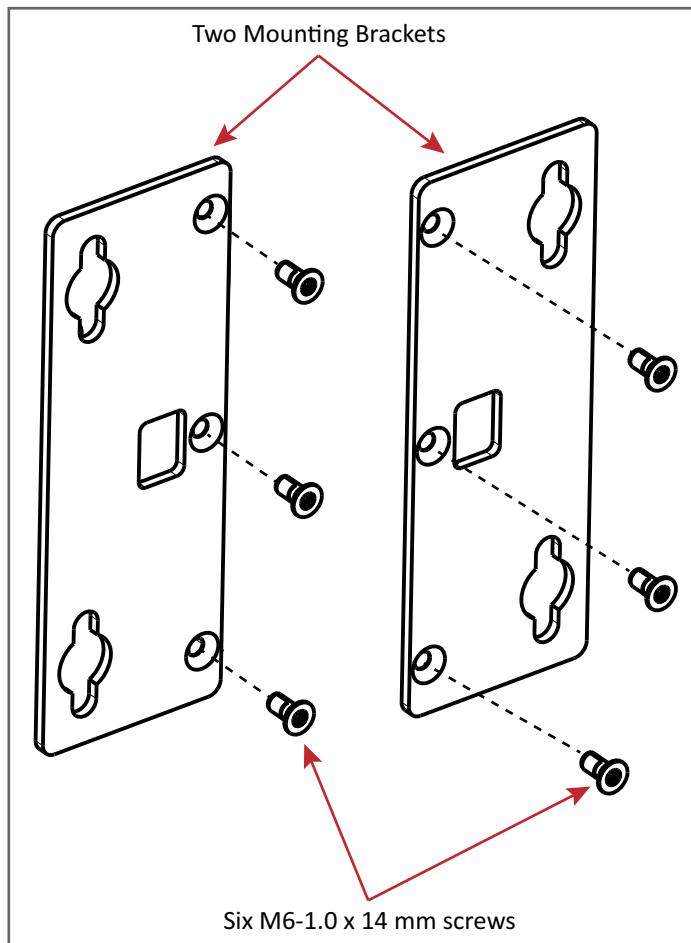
Flat Mounting Bracket Kit (PN 7774353-xx)
